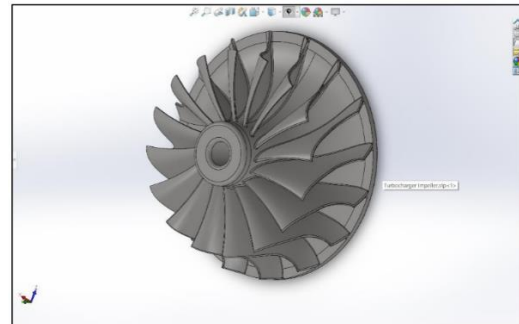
& 1.2 geometry of Turbocharger Impeller.
